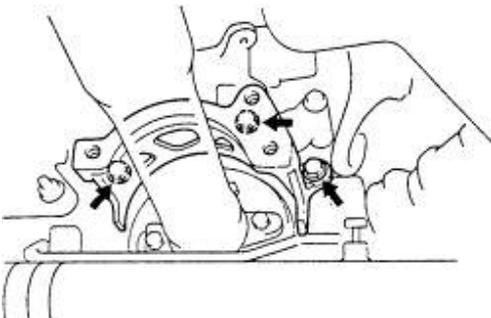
Three bolts retain the No. 1 equipment drive housing stay
